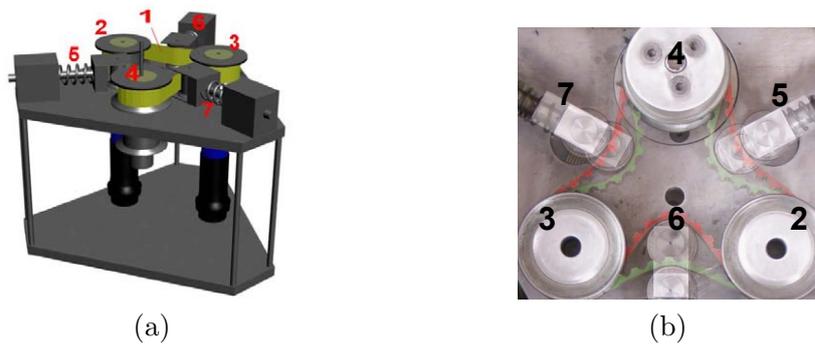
Drawing of the VSA (a) (the motors are connected to pulleys 2 and 3) and detail of the transmission belt and pulleys (b) (the red configuration is stiffer than the green one) [52].
